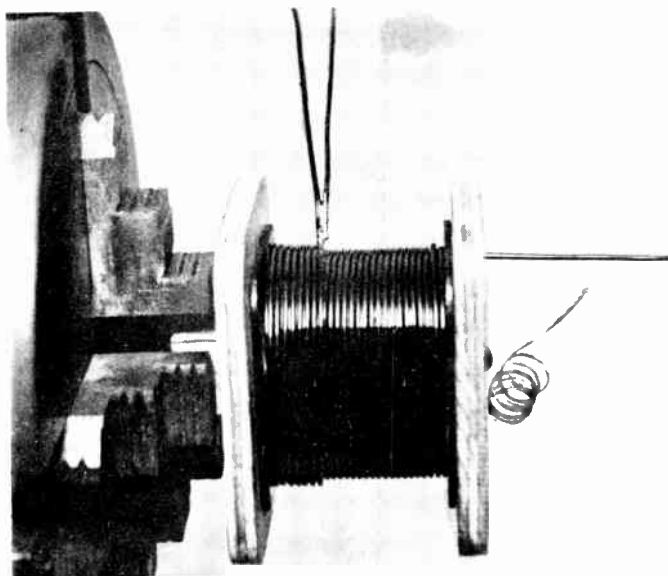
MAKING A TAPPING ON THE SECONDARY WINDING OF THE BELL TRANSFORMER.
